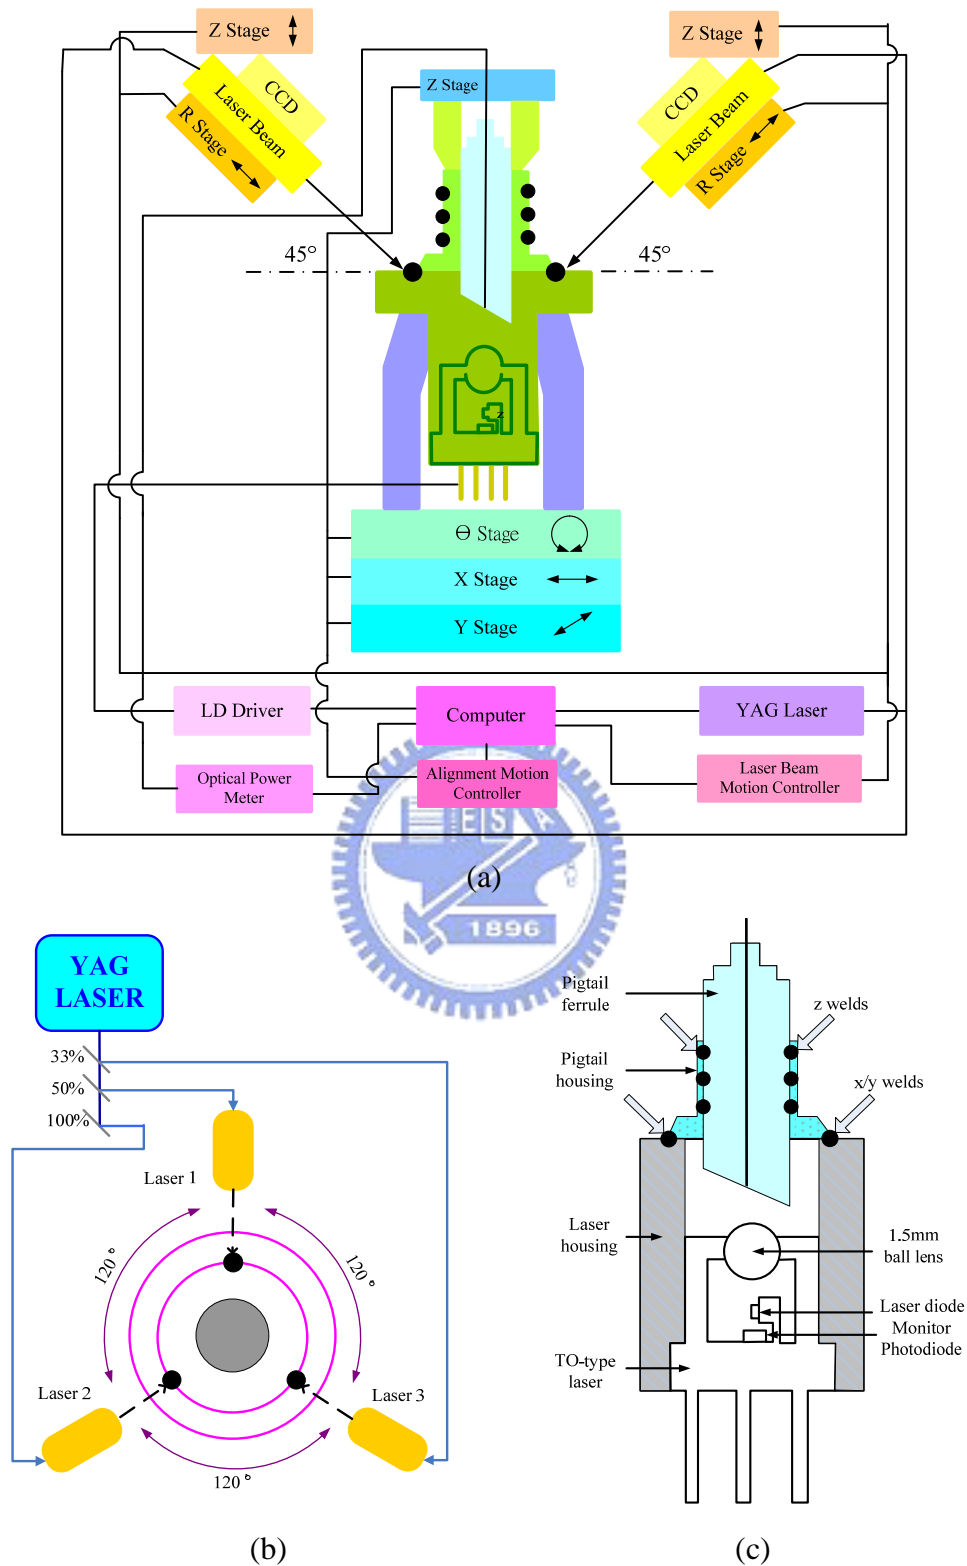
(a),(b) Schematic diagram of the laser welding system. (c) Configuration of the cylindrical-type laser module. Arrows indicate the welding spots.
